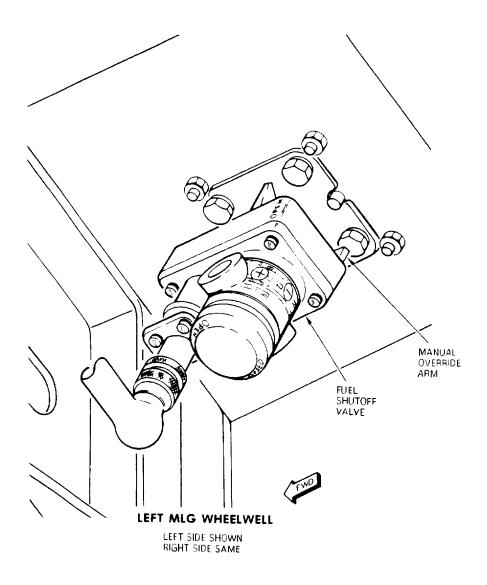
Engine Fuel Shutoff Leak Test Component Locator (Sheet 1 of 3)
